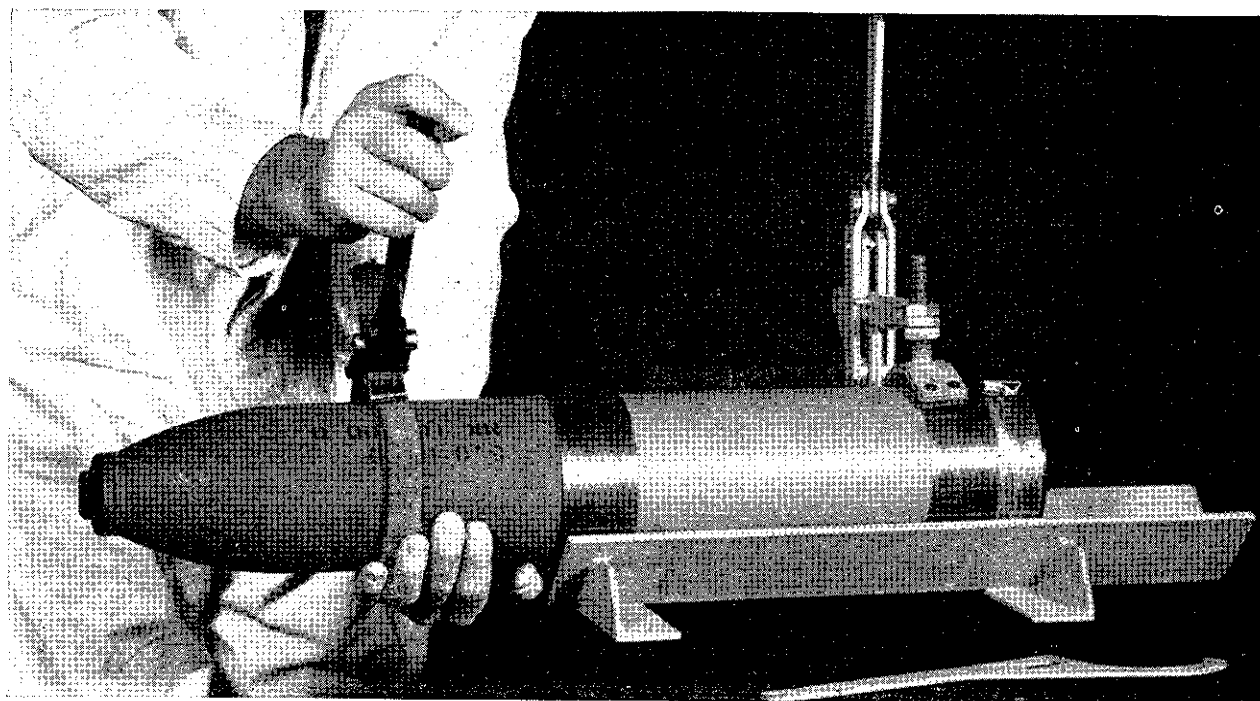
Use of Strap Wrench in Assembly of Head and Motor.
